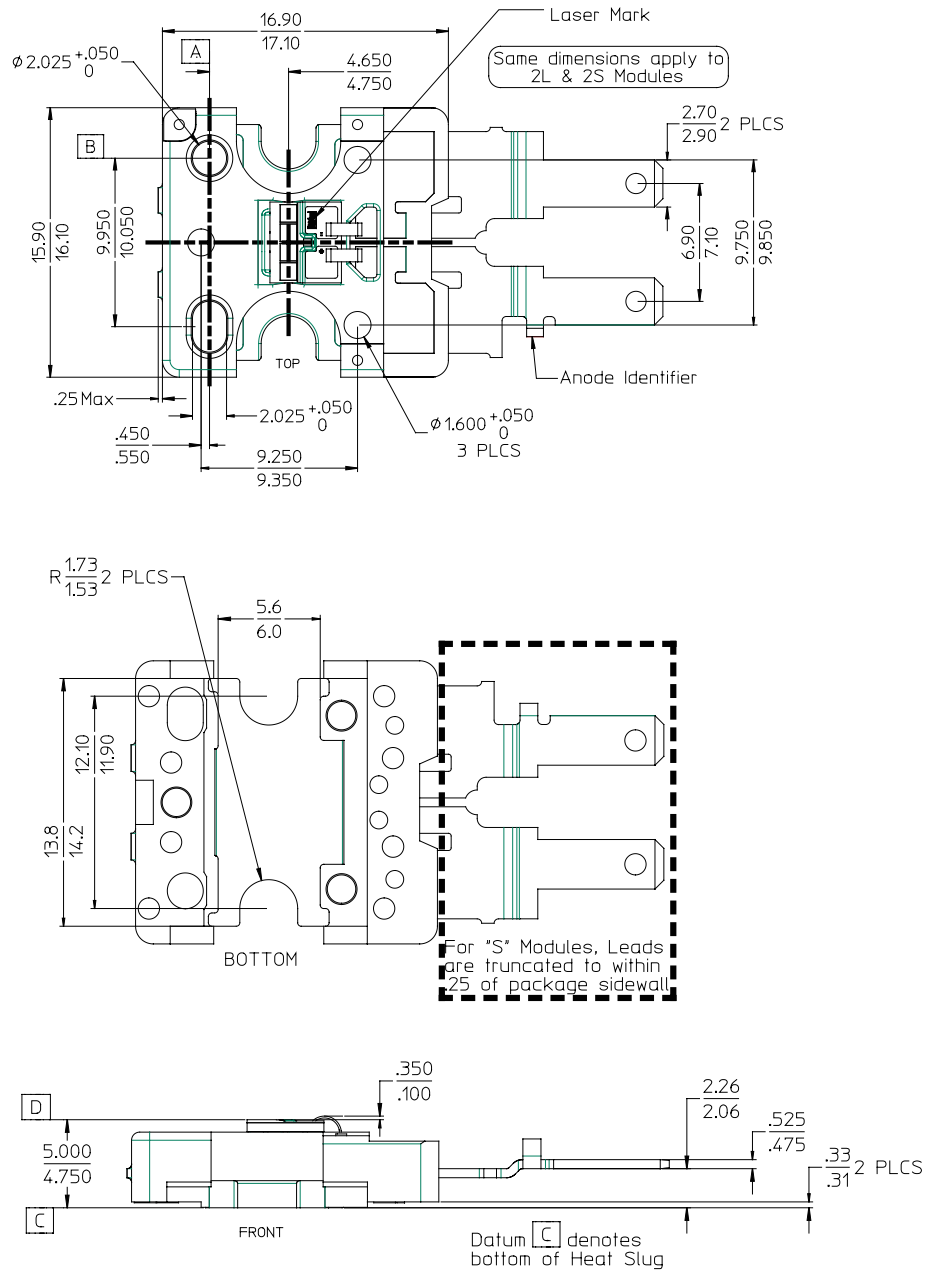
Mechanical dimensions for 1x2 solder pad configuration electrical connection.
